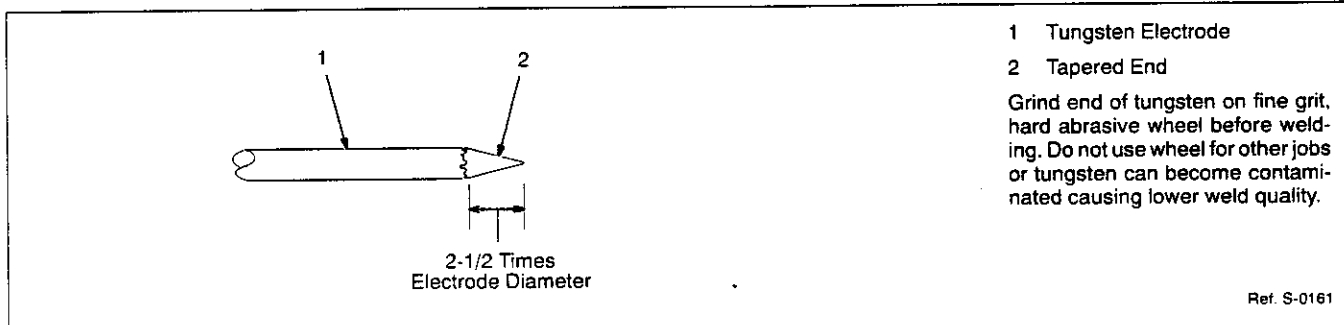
Preparing Tungsten For DC Electrode Negative (DCEN) Welding
